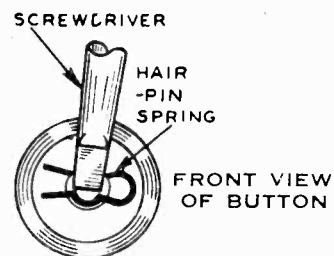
Putting a Hairpin Spring on a Push Button Shaft
